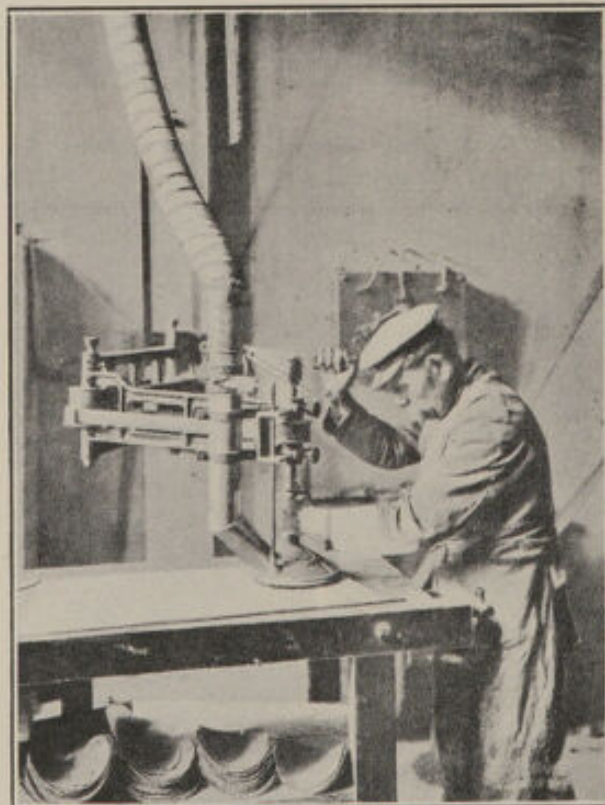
Flexible Piping for removal of Dust made by small horizontal sanding disc, which is movable over a wide surface. (Messrs. Sturtevant Engineering Co., Ltd., London.)
